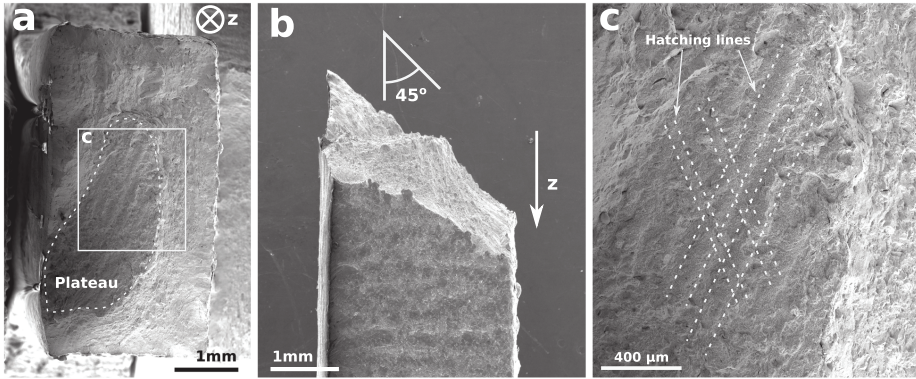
Fractography of plain specimen subjected to quasi-static loading. (a) Fracture surface, (b) side view and (c) detail from the fracture surface. Lines indicating hatch pattern.
